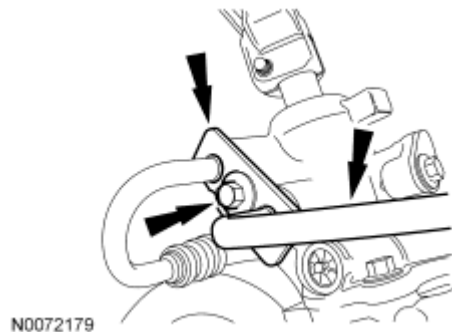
Identifying Bolt, Clamp Plate And PSP Tube
